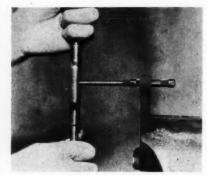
Reaming the piston pin bushing to size with an expansion reamer.
